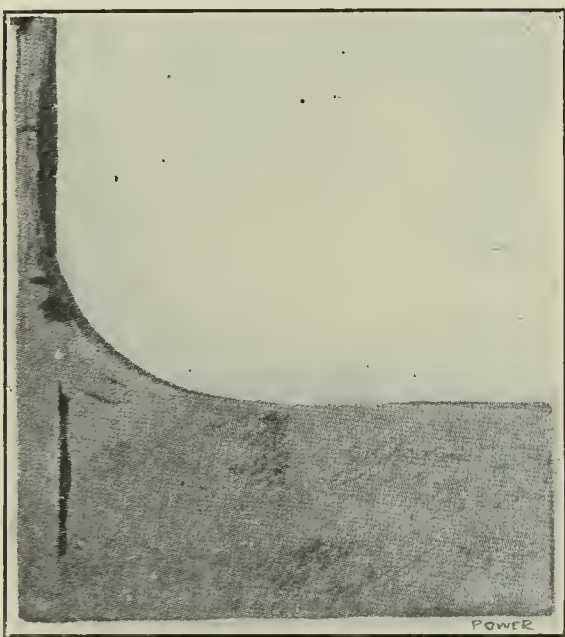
ARC-WELDED FLANGE AFTER BEING SAWED AND ROUGHLY FILED
